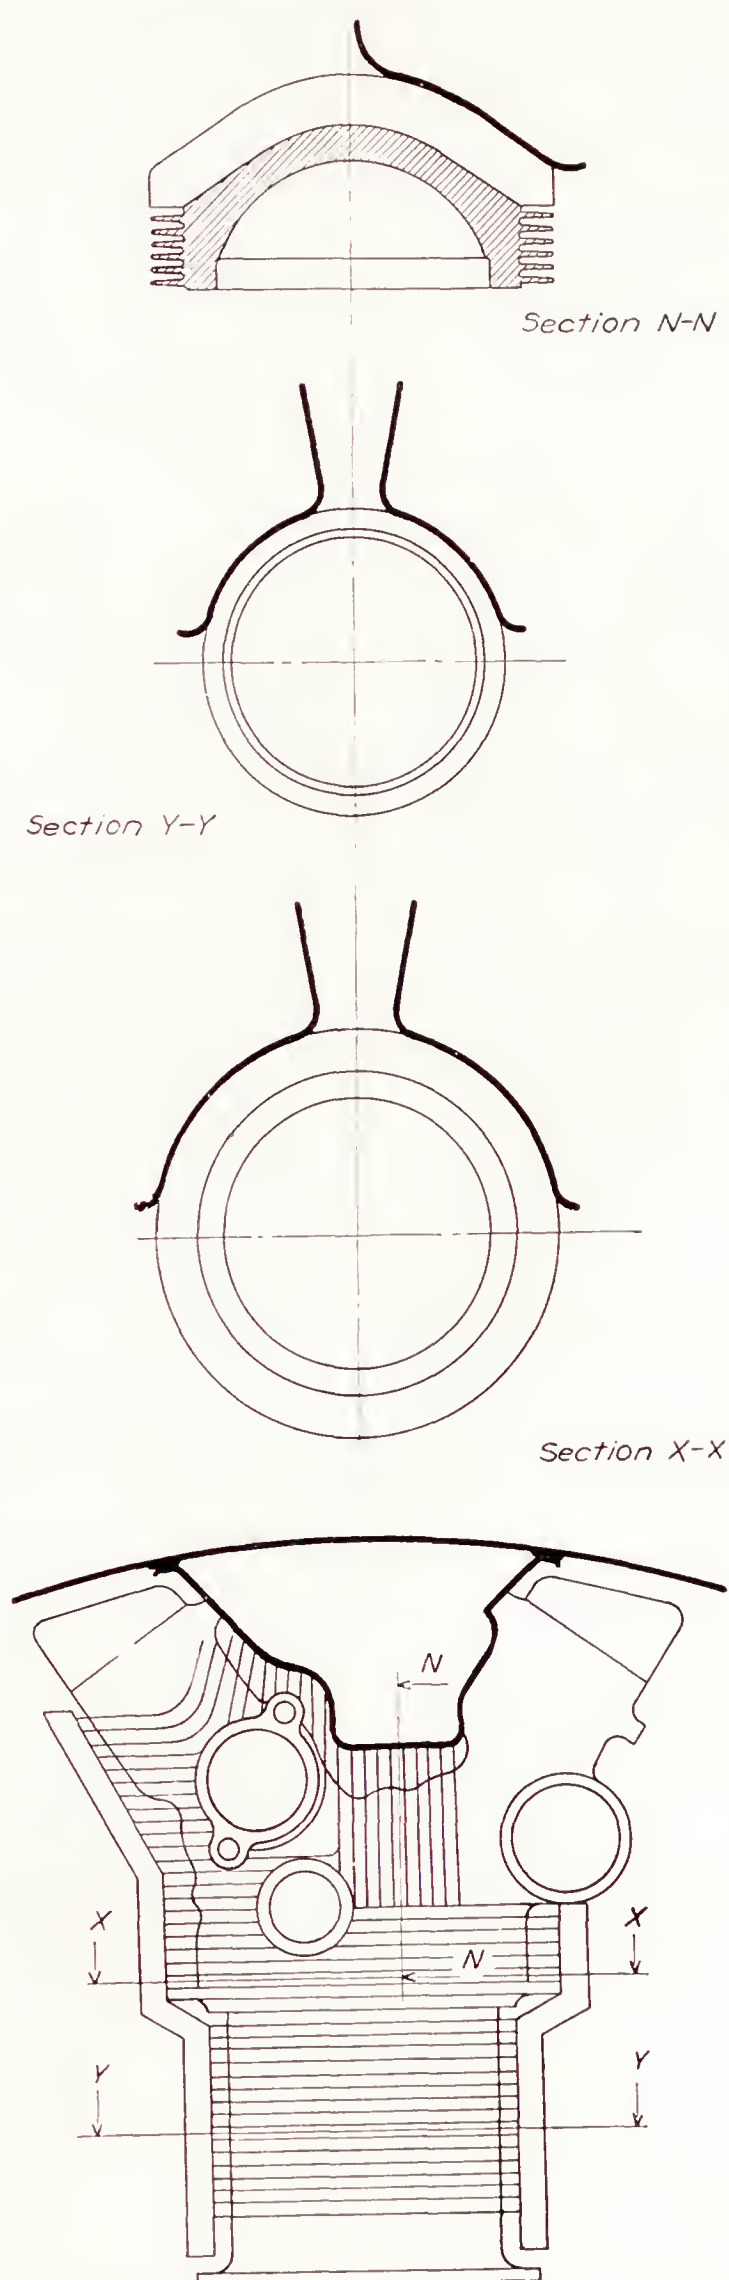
Typical baffle design for a cylinder of a radial engine.
